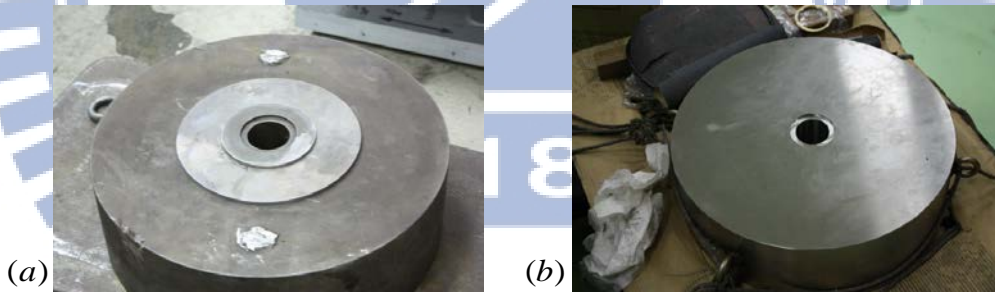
Three-layer tapered cylinder (a) before and (b) after fitting and surface polishing.
